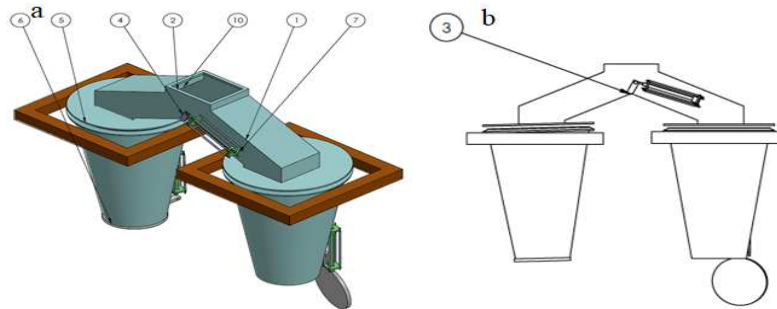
Representation of the weighing machine: (a) Block diagram of the weighing machine in isometric view, (b) Plan drawing of the weighing machine
